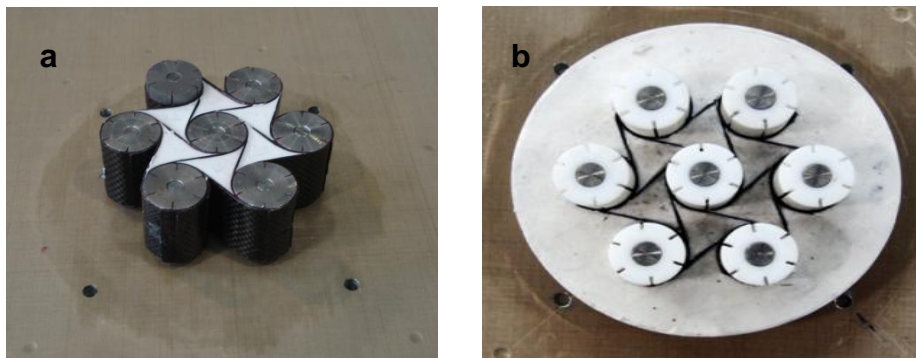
Cylinders for the assembly mold of the chiral units (a) Metallic (b) PTFE (Teflon)
